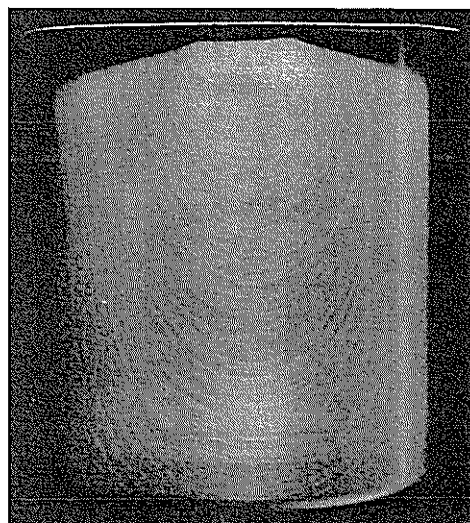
Deep drawn aluminum sheet showing looper lines (roping)⁵⁵⁾.
